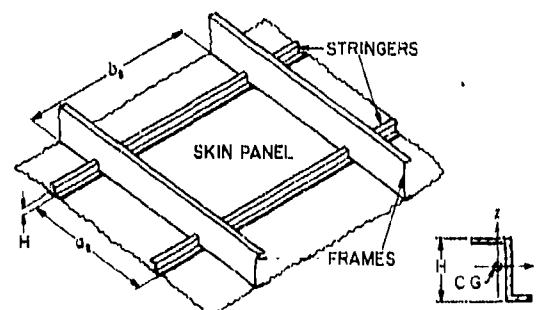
Typical Bay of Skin-Stringer Structure, and Typical Stringer Cross-Section
